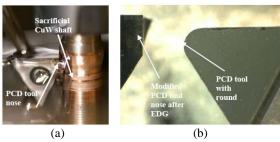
(a) On-machine EDG on PCD cutter, (b) PCD cutter before and after modification using EDG.
